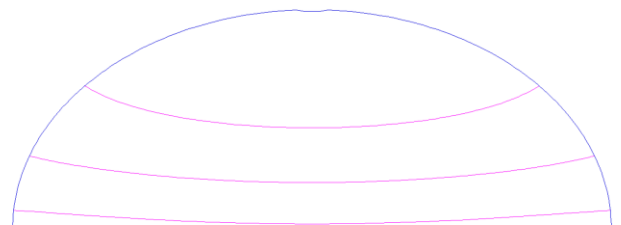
Weld Profile Incorporated into Geometrical Description of Cavity
